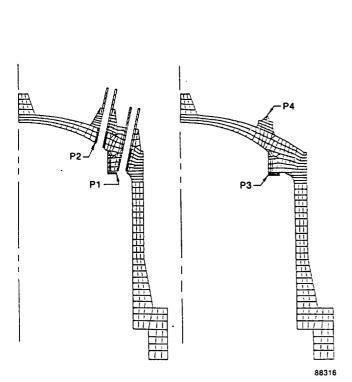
Mod II Configuration No. 4 Heater Casting Finite Element Model, Sectional Views
